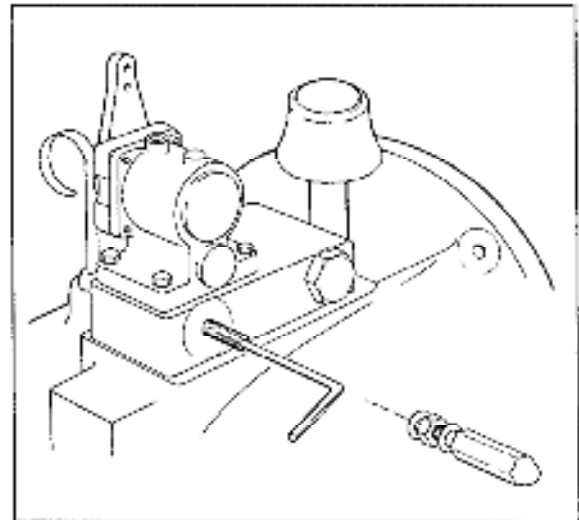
Clutch cylinder timing adjustment; To produce a faster shifting response, turn set screw COUNTER CLOCKWISE. To produce a slower response turn set screw CLOCKWISE.
